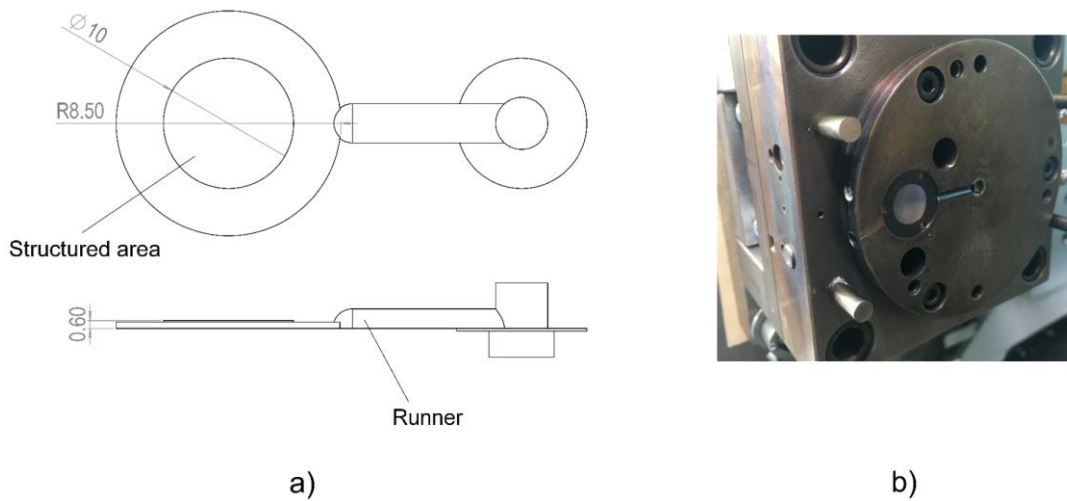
a) Geometry and nominal dimensions in mm of the moulded part. b) Movable side of the mould with nano-structured insert.
